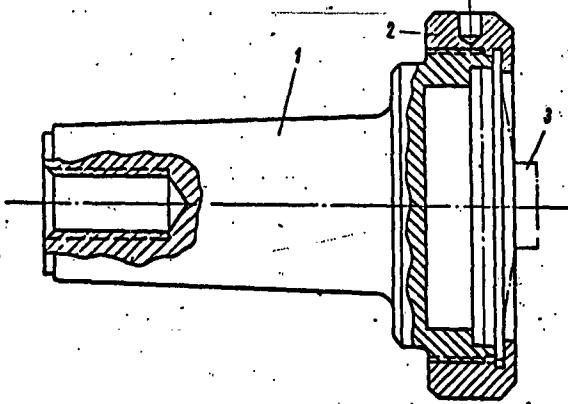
Mandrel for cutting thread in boss. 1) Mandrel; 2) nut; 3) cover.
